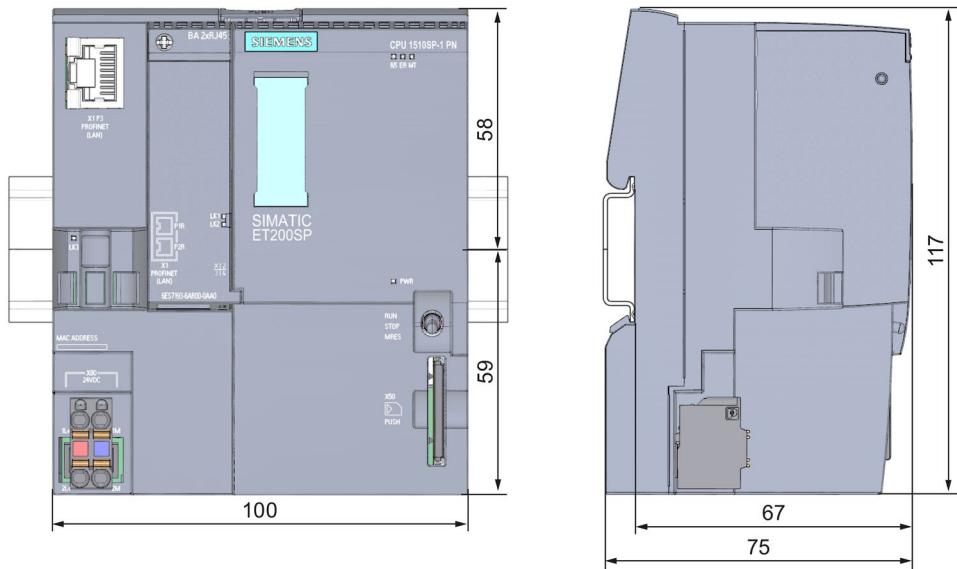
Dimensional drawing CPU 1510SP-1 PN
